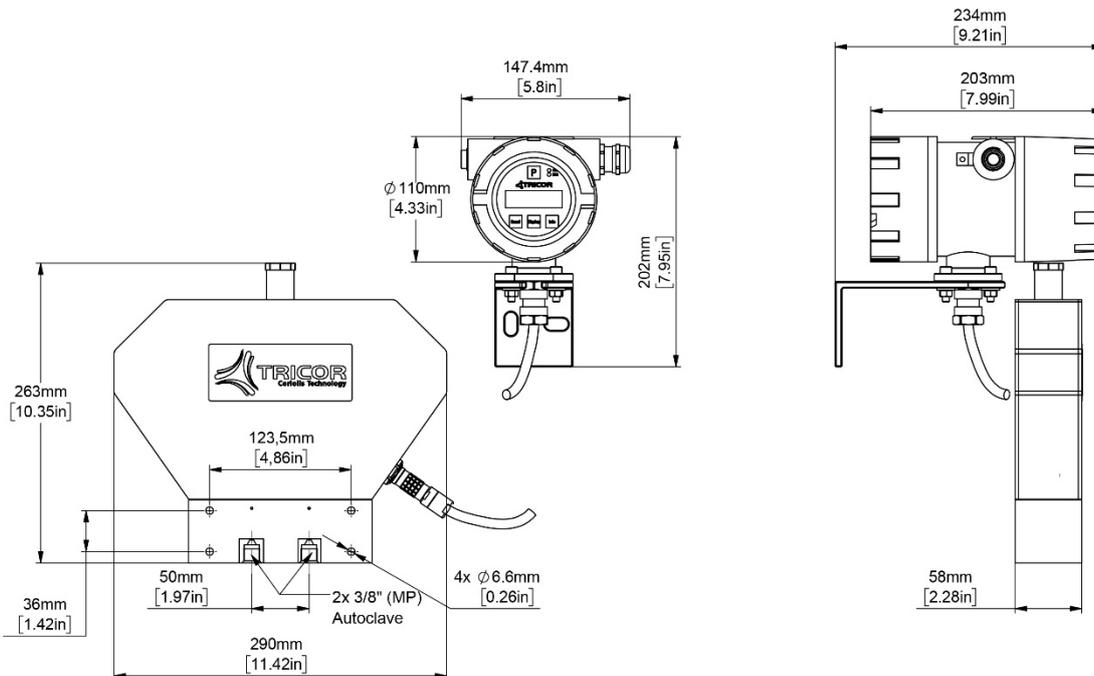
Meter Dimensions TCMH 0450, Ex/Ex1
